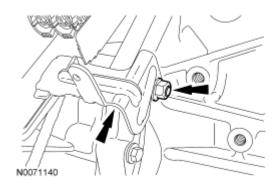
Locating CMS Wire Connector Bracket Aside And Nut Courtesy of FORD MOTOR CO.
